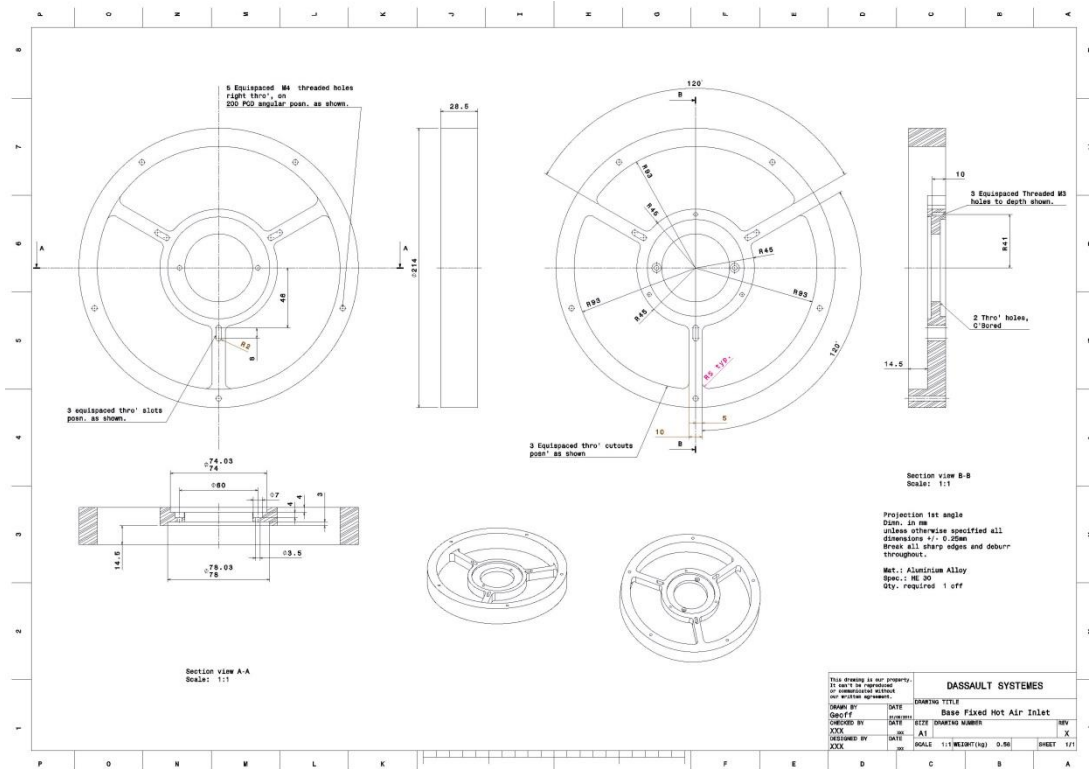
A –Base Fixed Hot Air Inlet: Mark II Thermal Motor
